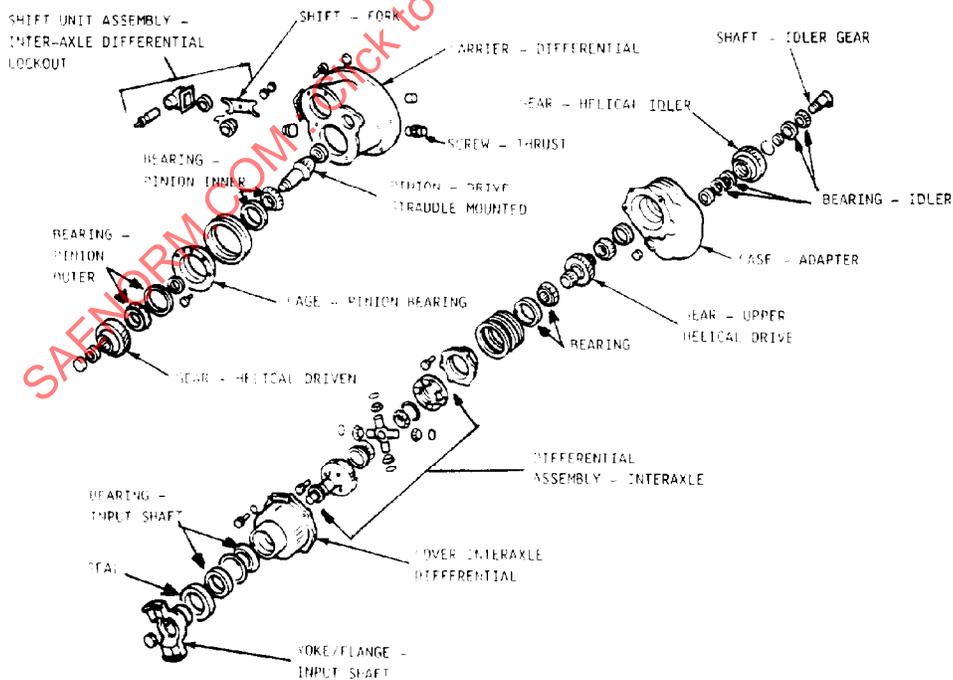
B—TANDEM FORWARD/REAR AXLE—THREE GEAR TRANSFER TRAIN
